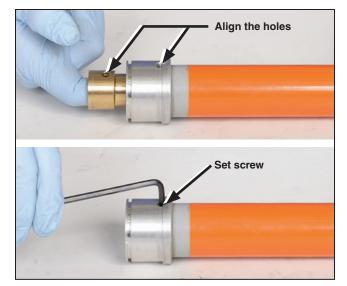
Install the stationary contact assembly to the inner tube assembly.
